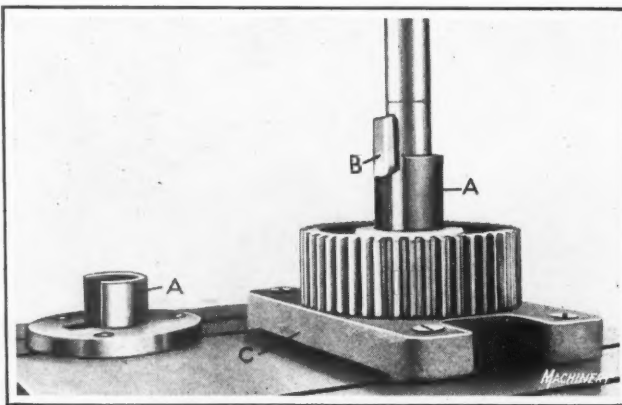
Details of Work-holding Fixture and Arbor of the Type used on the Keyseating Machine shown in Fig. 11
